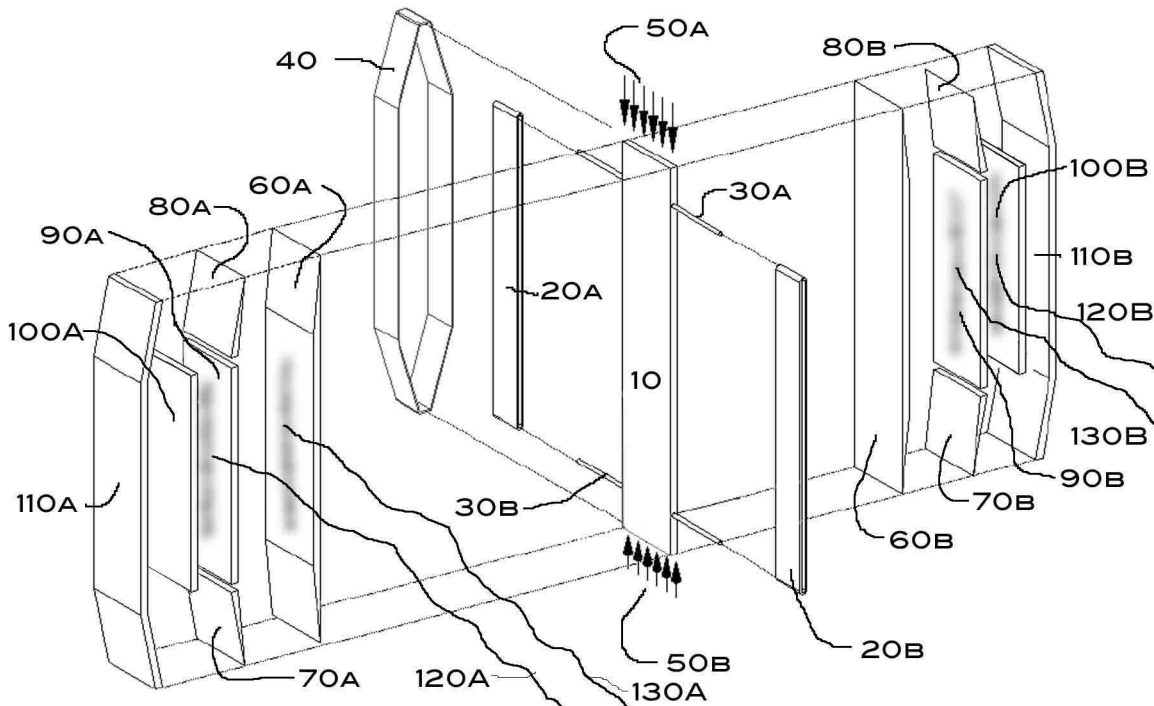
Exploded View of the PBP/DEAS Actuator Element¹⁵
